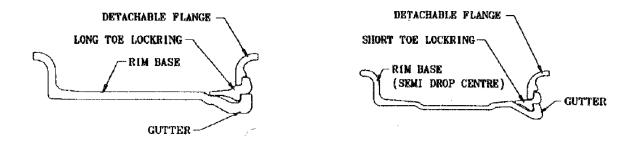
THREE-PIECE RIM NOMENCLATURE
